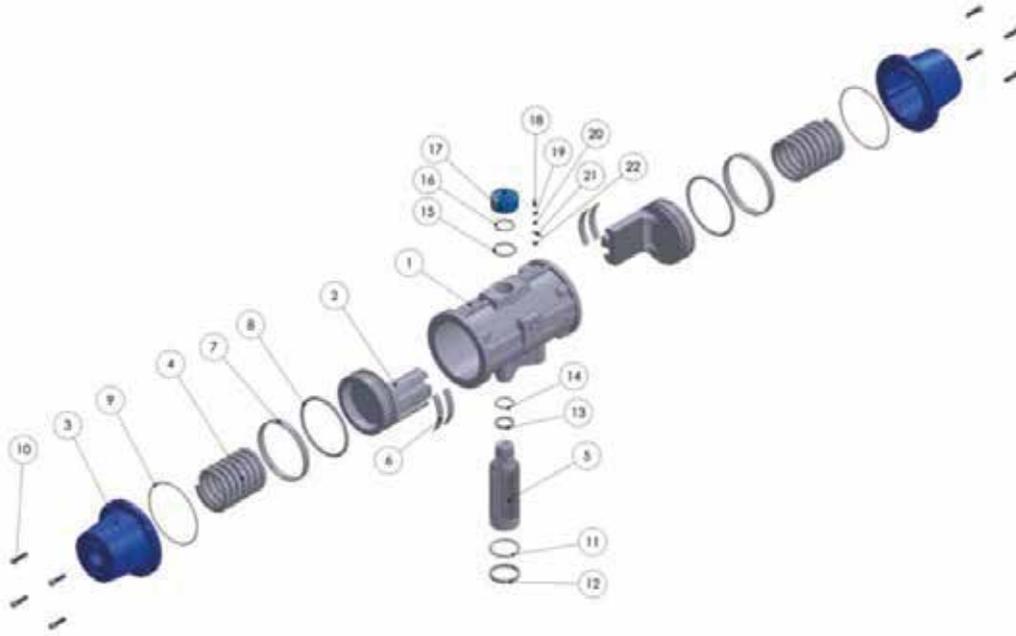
Exploded drawing of Double Acting Actuators (RA/RX/RAM/RXM 032-040-060-080-100-200 DA)
